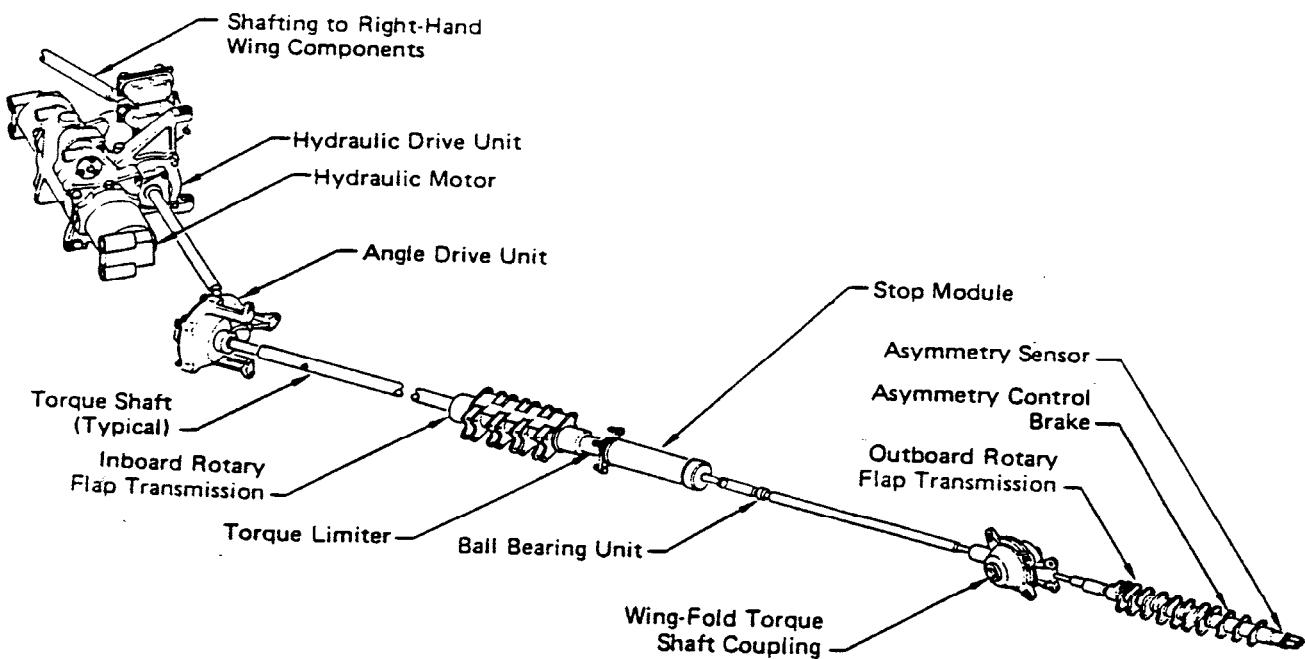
F/A-18 A/B/C/D LEADING EDGE FLAP DRIVE SYSTEM
